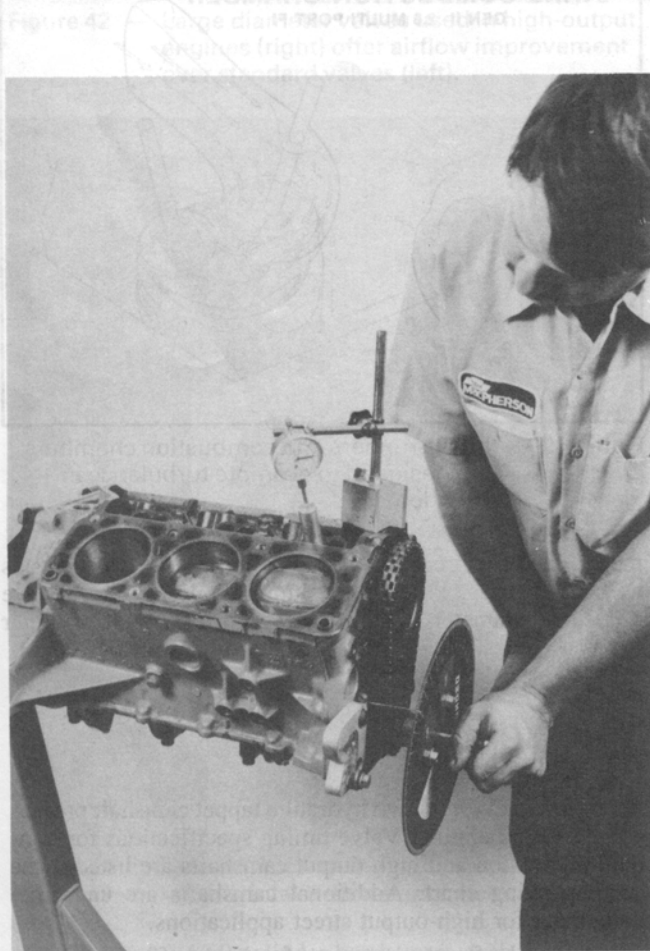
Check camshaft phasing with degree wheel and precision dial indicator.
